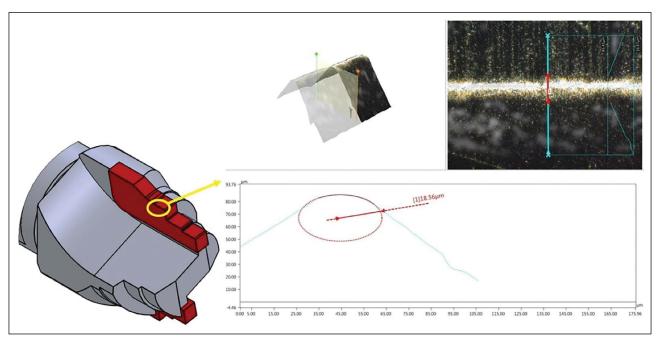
Measured edge radius of cutting tools with 15° radial rake angle after 20 min. of drag finishing.
